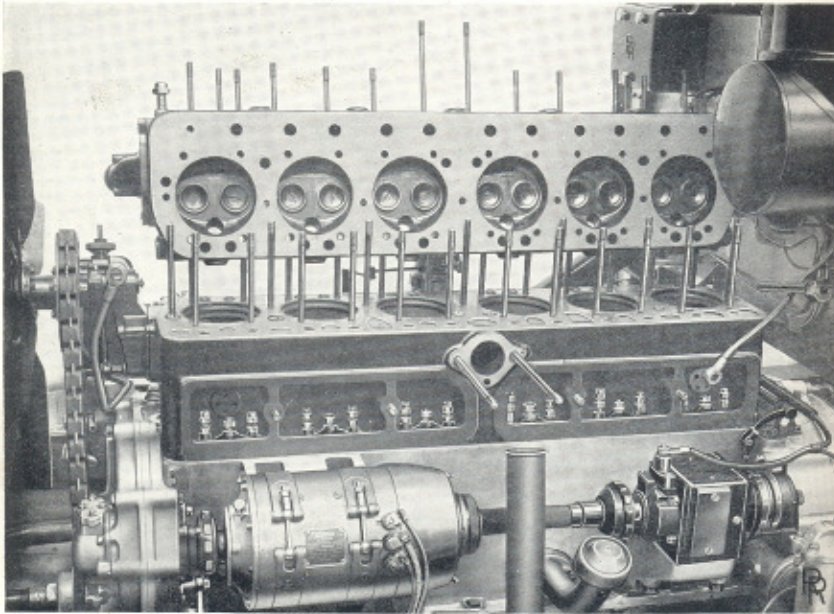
CYLINDER HEAD REMOVED FOR DECARBONISING.
